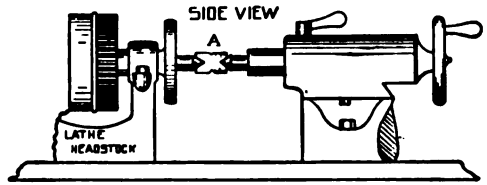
SHOWING GAUGE ON LATHE CENTERS AT A.
